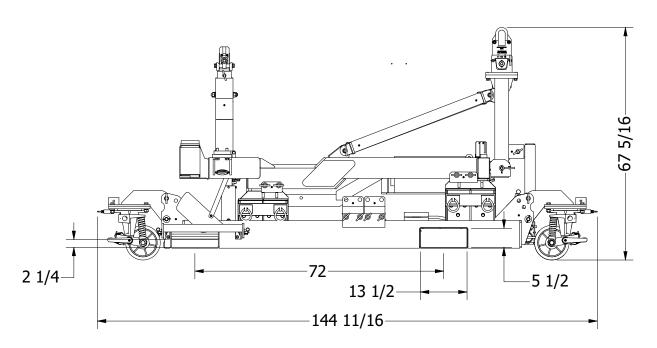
Engine Transport Stand Dimensions with Blockers Deployed
